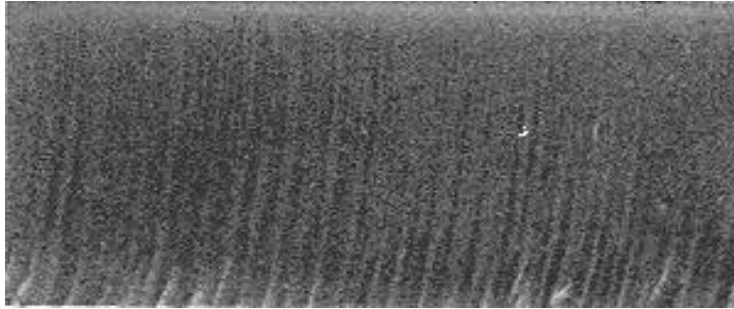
Typical appearance of the upper smooth zone and the lower striated zone of a surface of product processed using Abrasive waterjet cutting.
